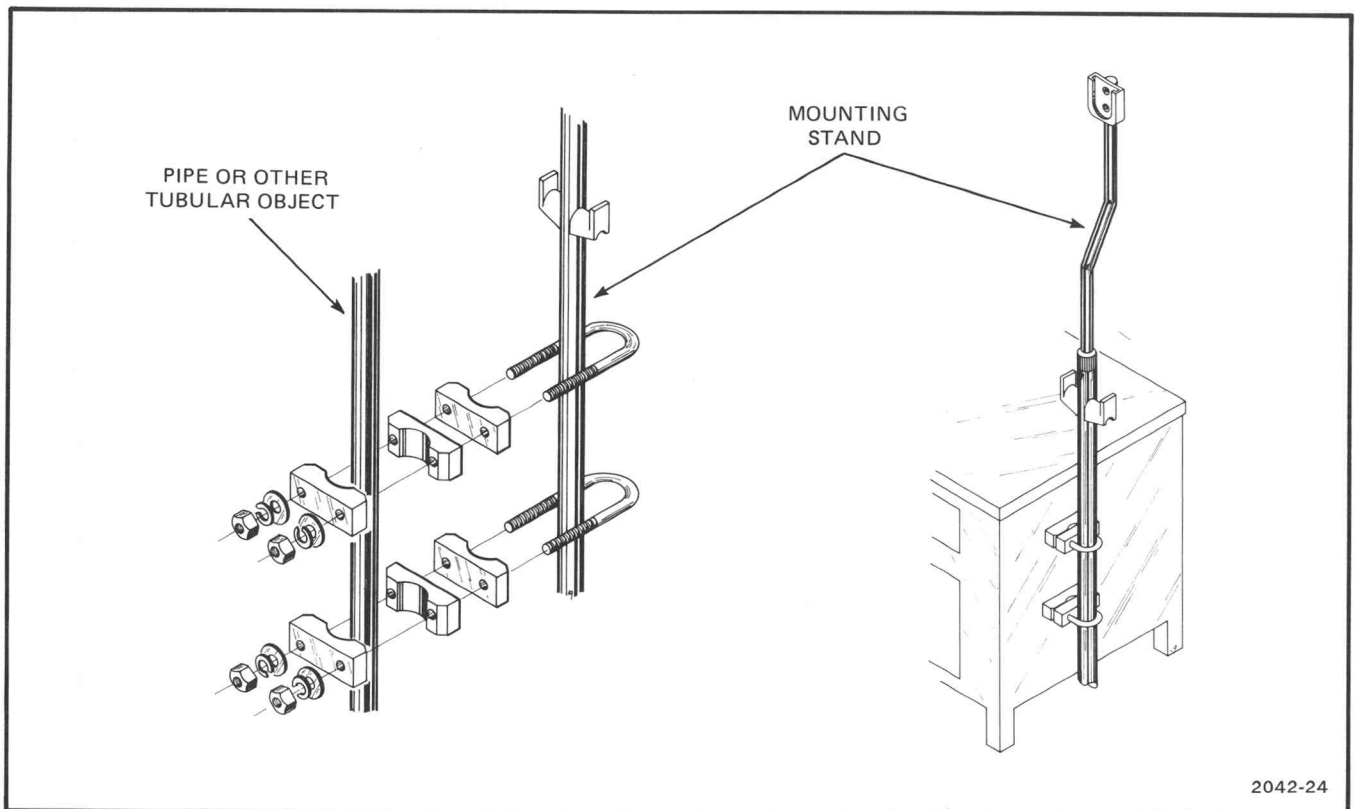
Installing mounting stand to tubular object (pipe) or cabinet side.
